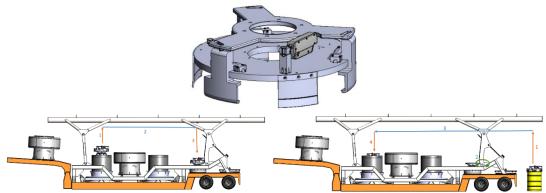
Lifting the shielding plug of the CAROLINE-R80 and loading/unloading 400l drums
